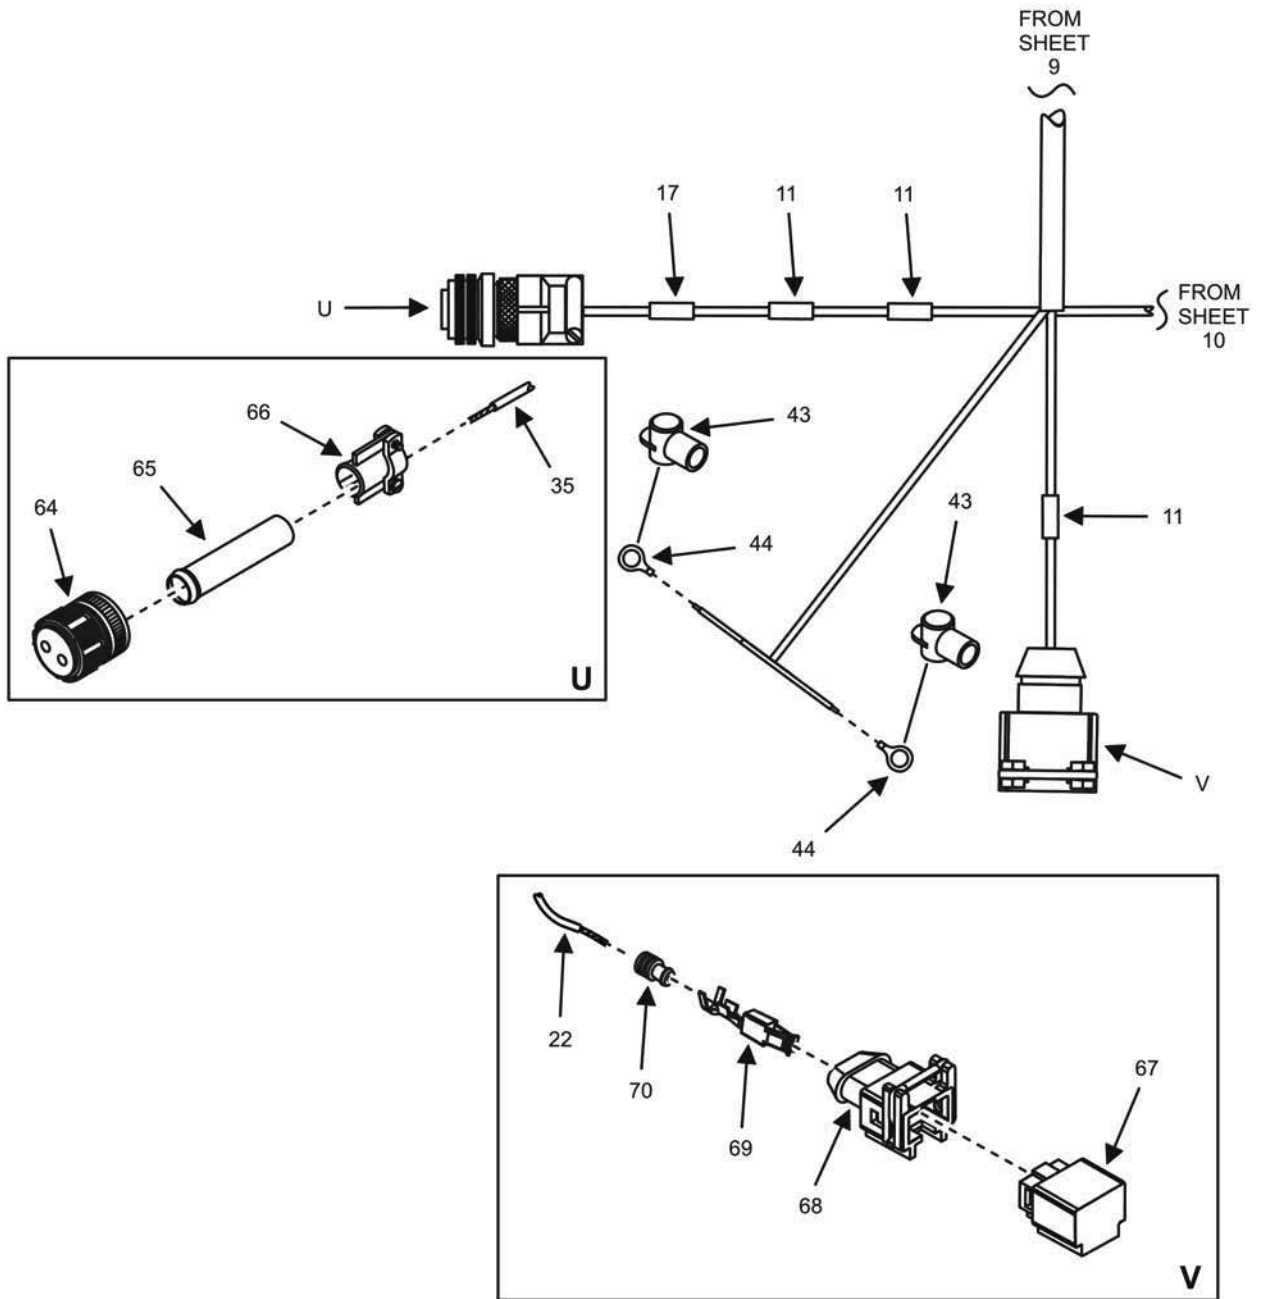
Engine Wiring Harness (Sheet 11 of 14).
